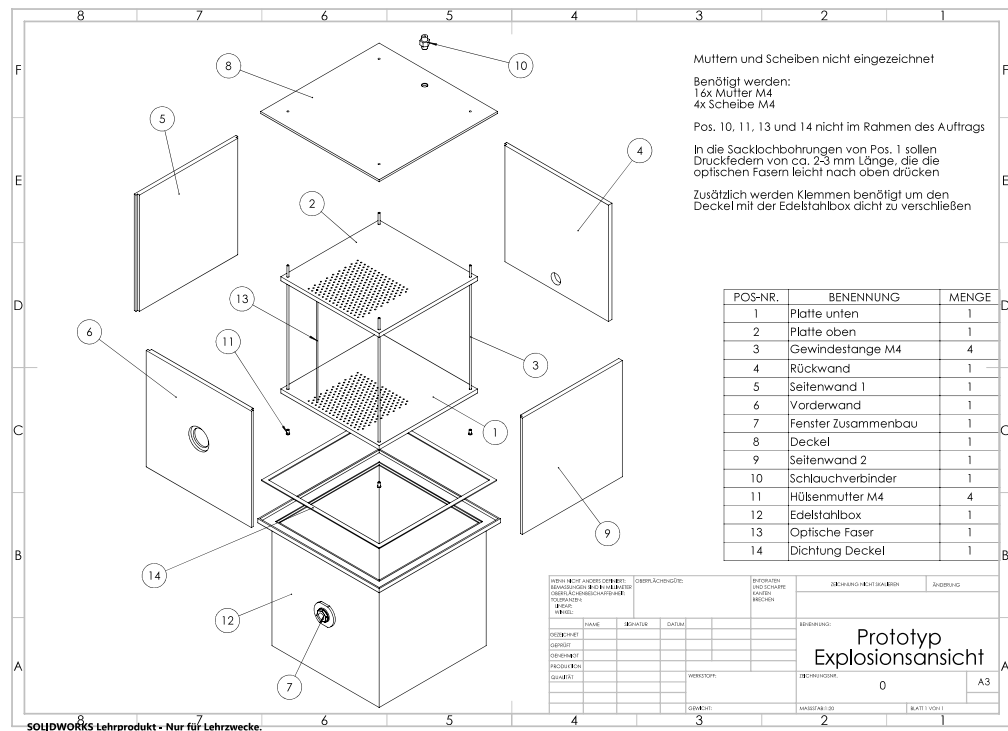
Exploded-view of the construction drawing for the prototype detector. The complete construction drawing can be found in the appendix A.1.1.
